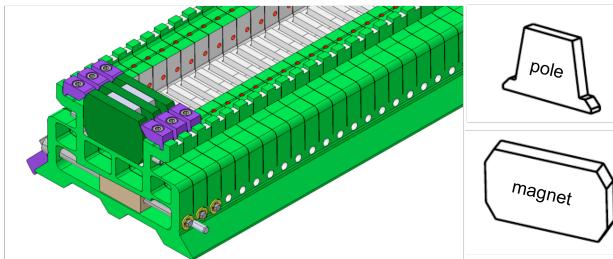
The aluminium extruded block keeper, design to hold 22 periods.
